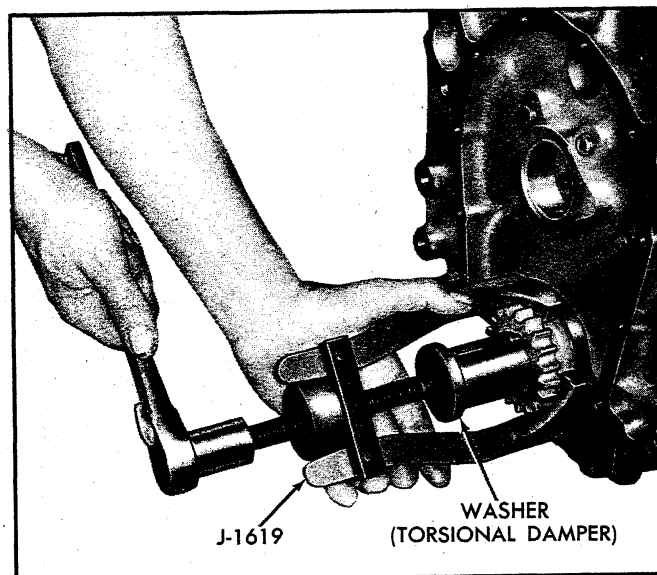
V - Removing Crankshaft Sprocket (396 and 427)
